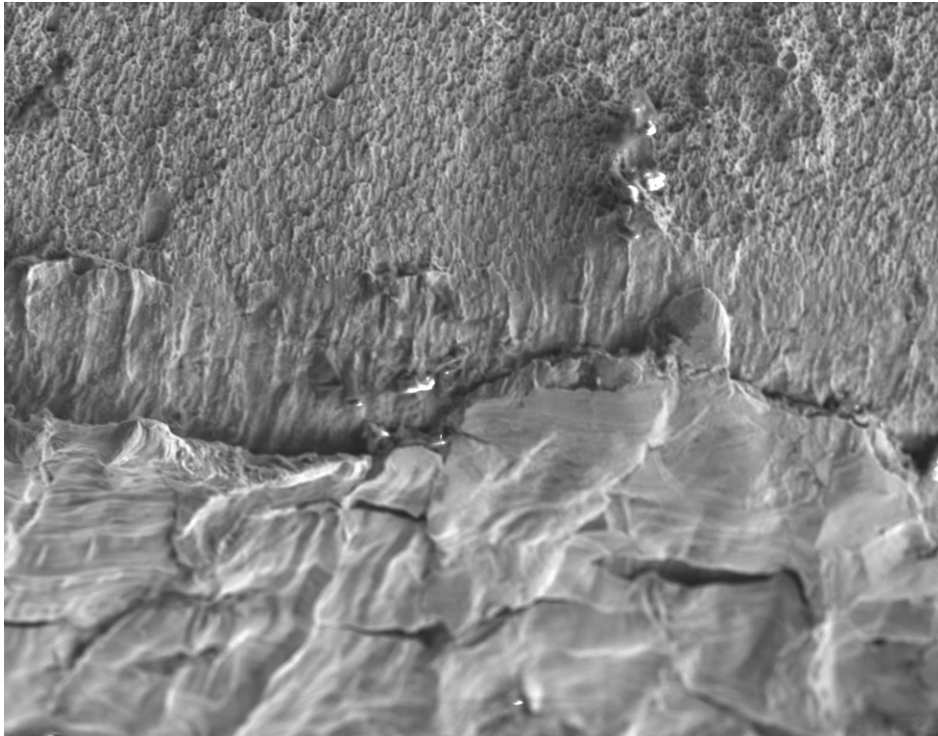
Dynamic sample fracture surface closeup also showing the galvanized layer.
